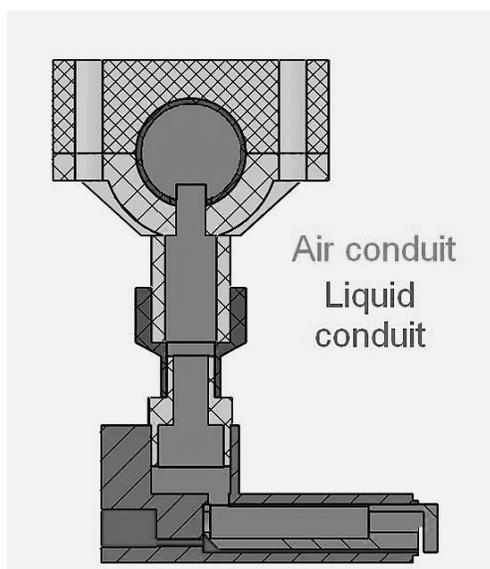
Kamterter ULV Sprayer fixture showing how the air component and the liquid component enter the fixture and interact at the spray fixture surface to form droplets.
